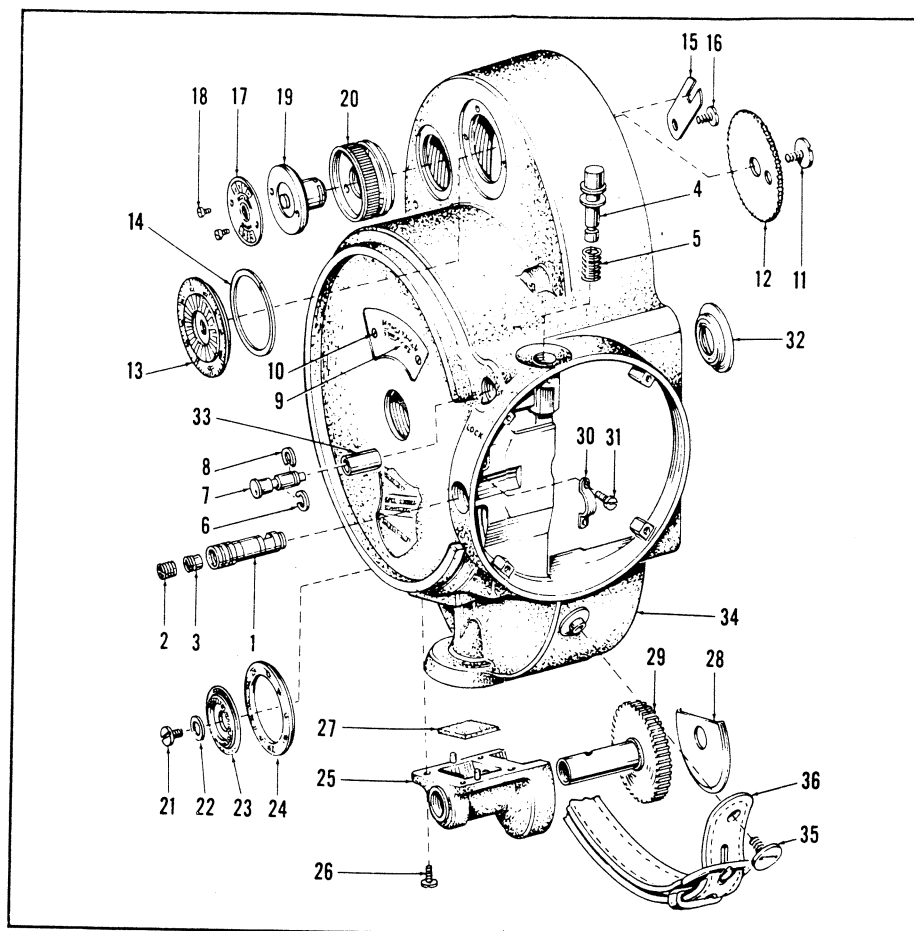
Camera Frame Assembly - Des. 70DA, 70DL, and 70DR
